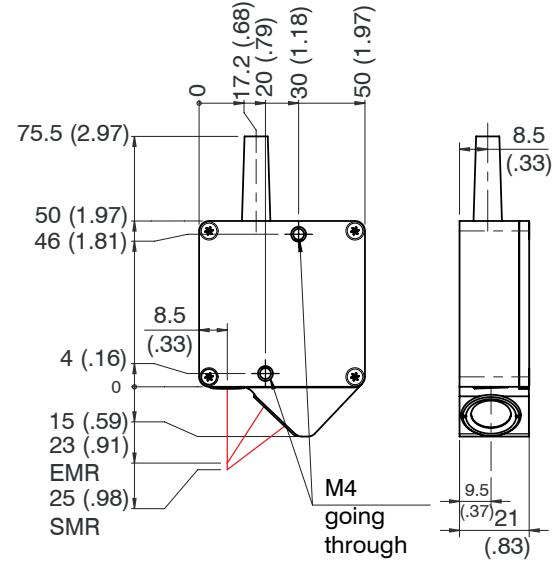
Dimensional drawing LD1610-2 and LD1610-4 / LD1630-2 and LD1630-4
